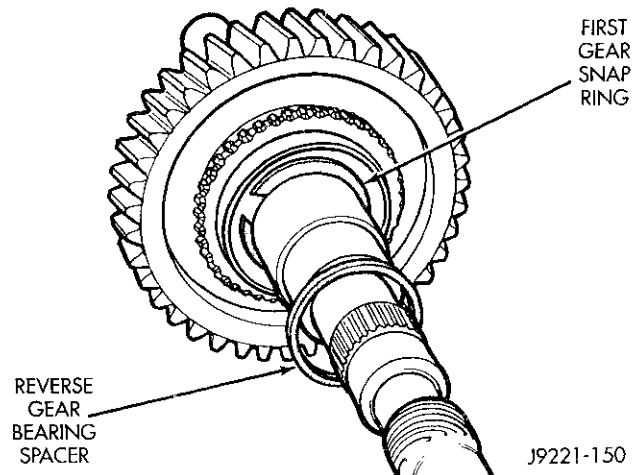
Reverse Gear Bearing Spacer And First Gear Snap Ring Removal
